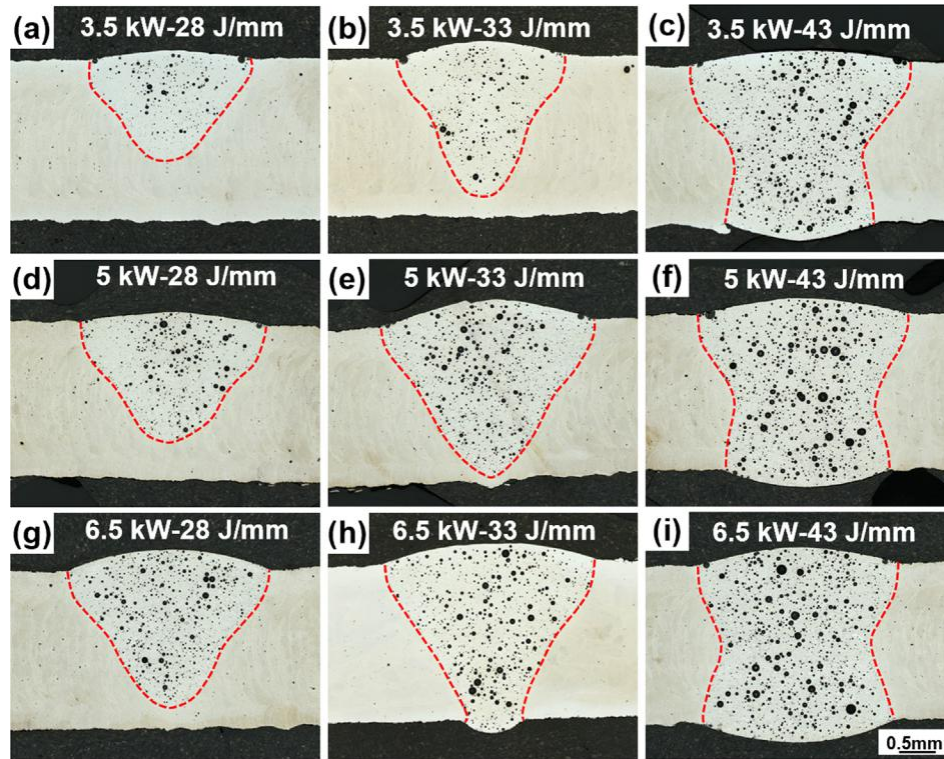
Cross-section images of welds under standard 1 atm pressure with various laser power, scan speed and linear energy: (a) 3.5 kW–125 mm/s–28 J/mm, (b) 3.5 kW–106 mm/s–33 J/mm, (c) 3.5 kW–81 mm/s–43 J/mm, (d) 5 kW–179 mm/s–28 J/mm, (e) 5 kW–152 mm/s–33 J/mm, (f) 5 kW–116 mm/s–43 J/mm, (g) 6.5 kW–232 mm/s–28 J/mm, (h) 6.5 kW–197 mm/s–33 J/mm, (i) 6.5 kW–151 mm/s–43 J/mm.
